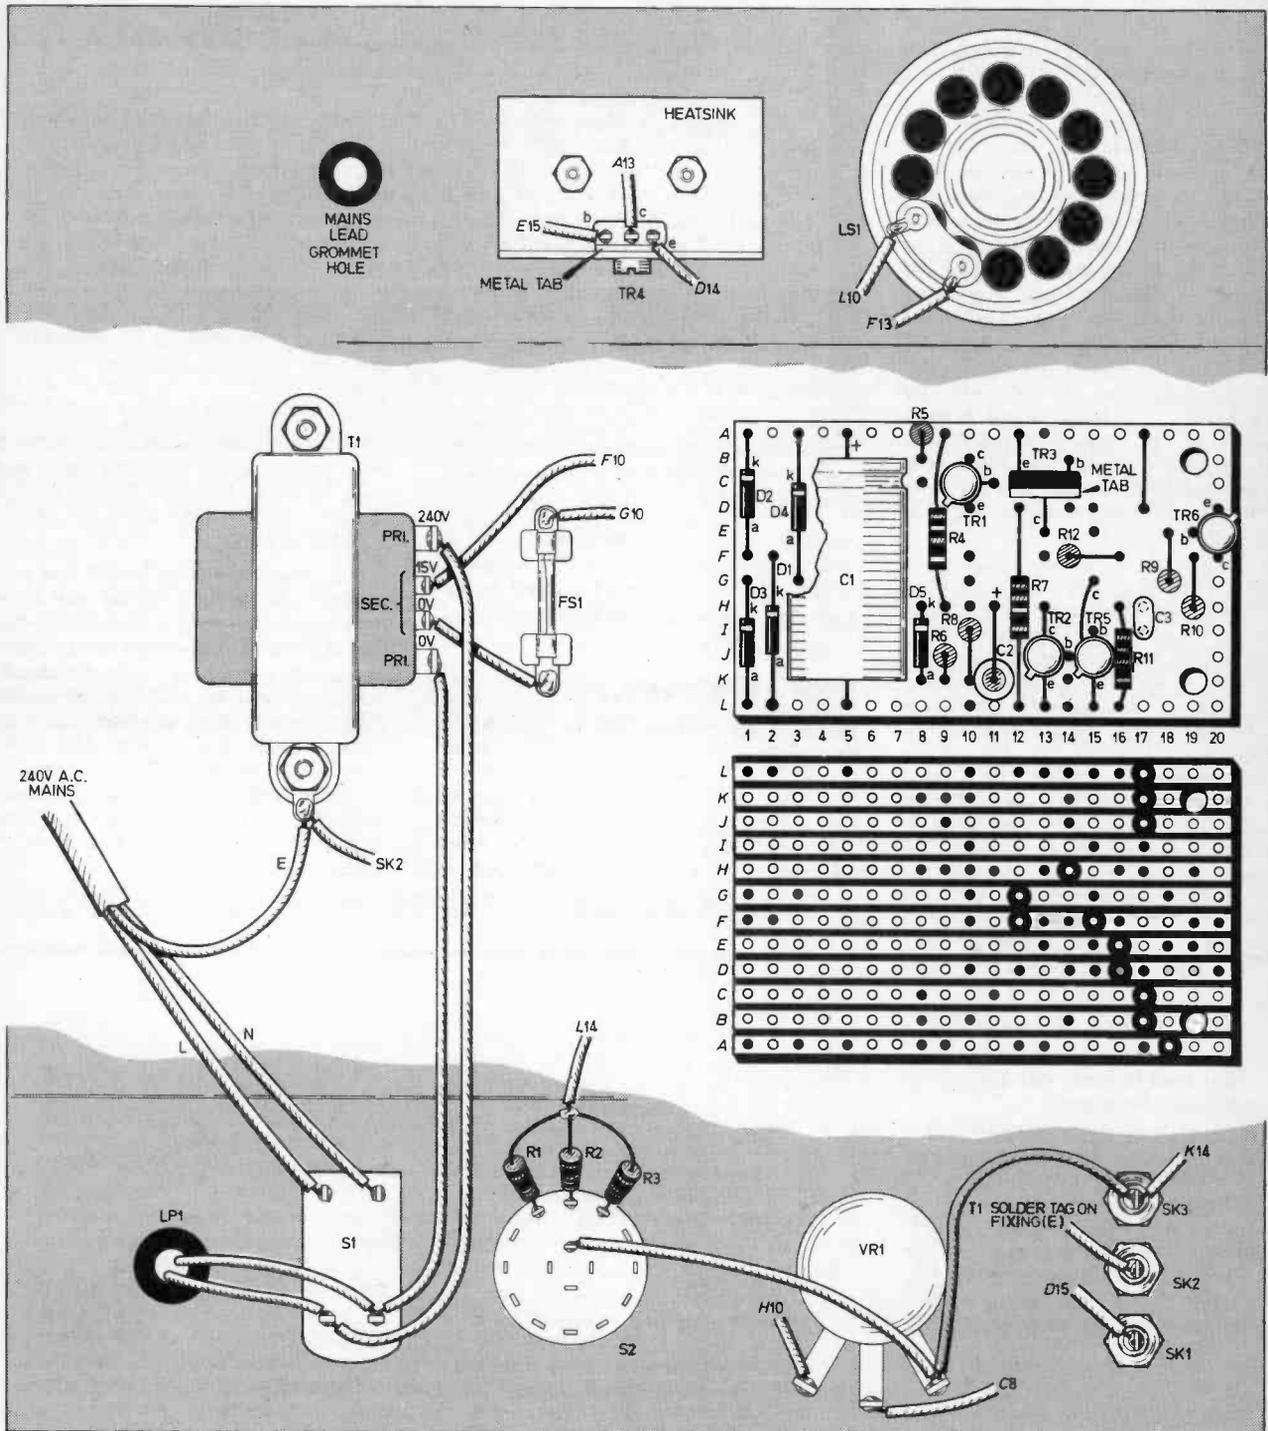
The metal chassis has been folded out flat to clarify interwiring details and show position of components mounted on front and back panels. The component layout and breaks to be made on the underside copper strips of the circuit board are also shown.
